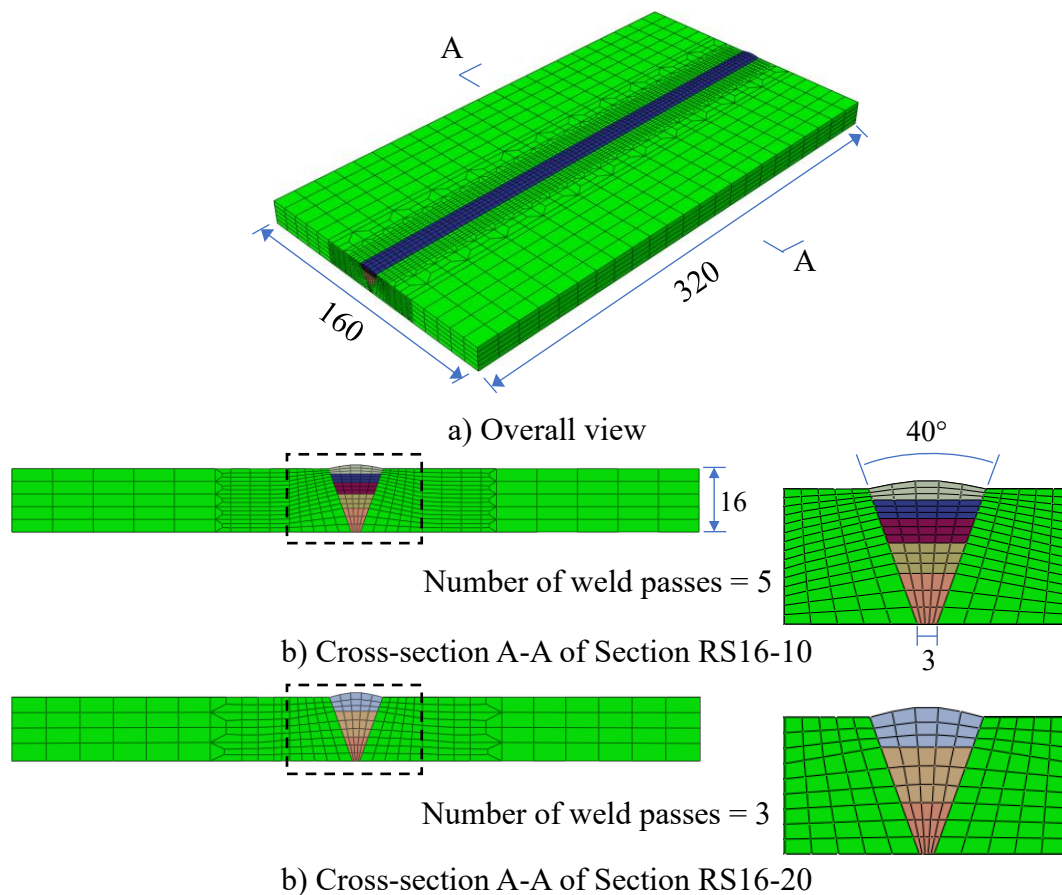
3D model of 16 mm thick weld sections
